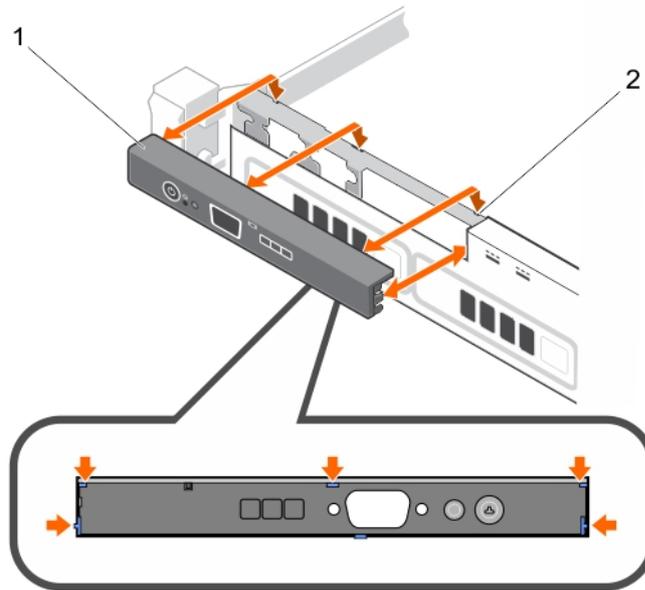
Removing and installing the control panel—four 3.5 inch hard-drives chassis
